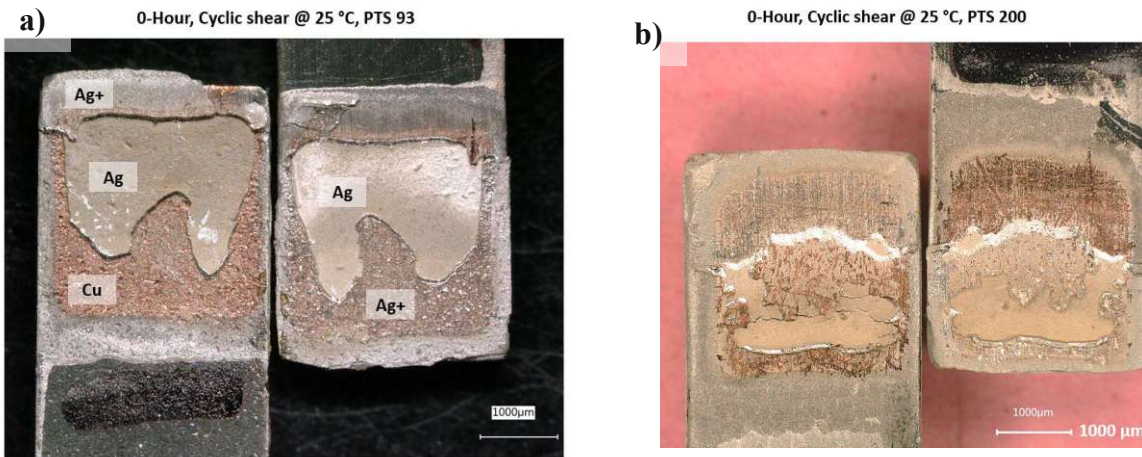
Microscopic images from two lap-joints (a-b) showing the fracture surfaces.
